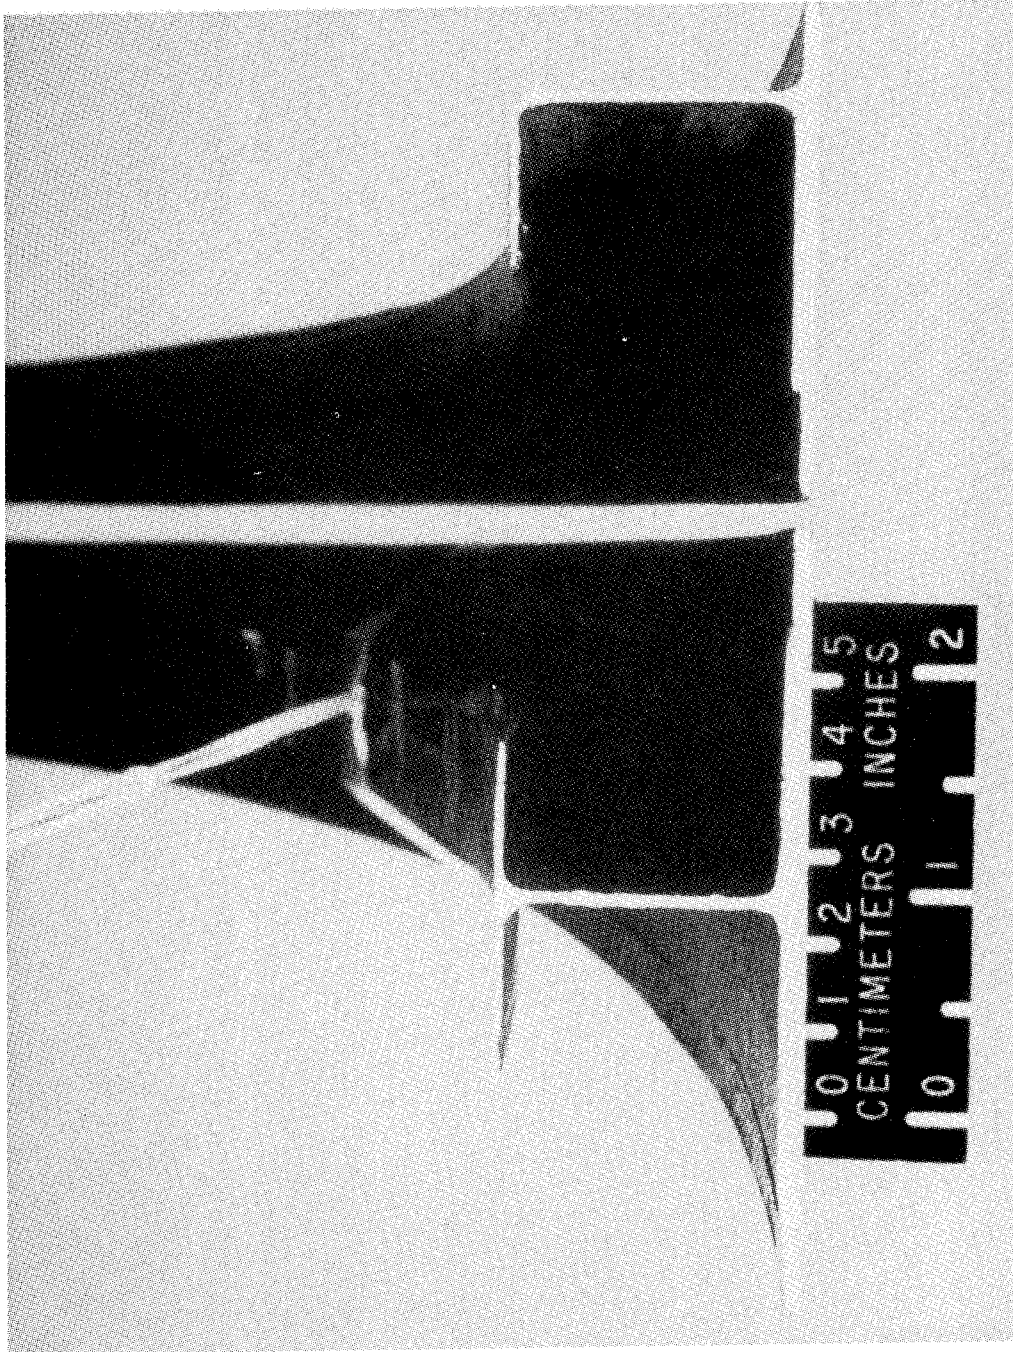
Cross sections of the test specimens: The photograph shows the cross sections of the I-section and channel section specimens. A sixteen ply 'skin' is bonded to the outside flanges of each specimen. The cap flanges are the smaller flanges furthest from the skin.
